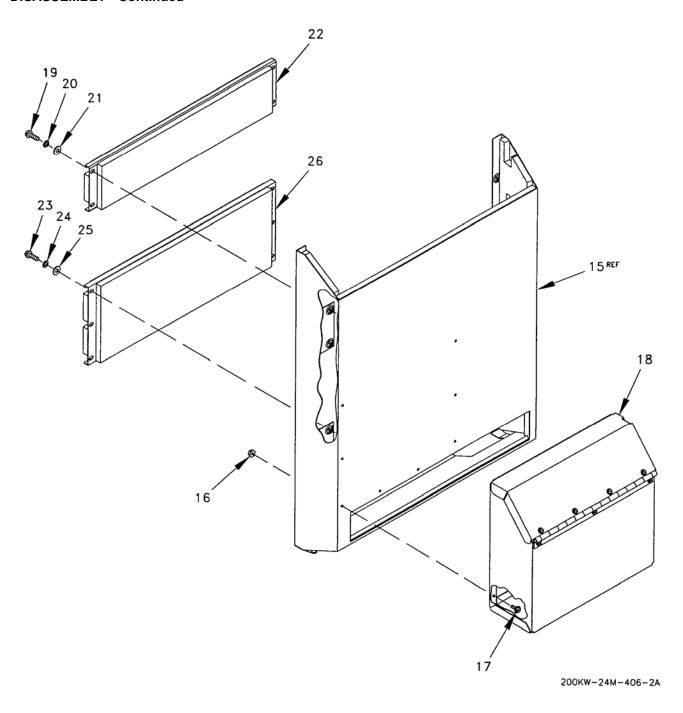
Left Rear Door Assembly (Latch) (Sheet 2 of 2).
